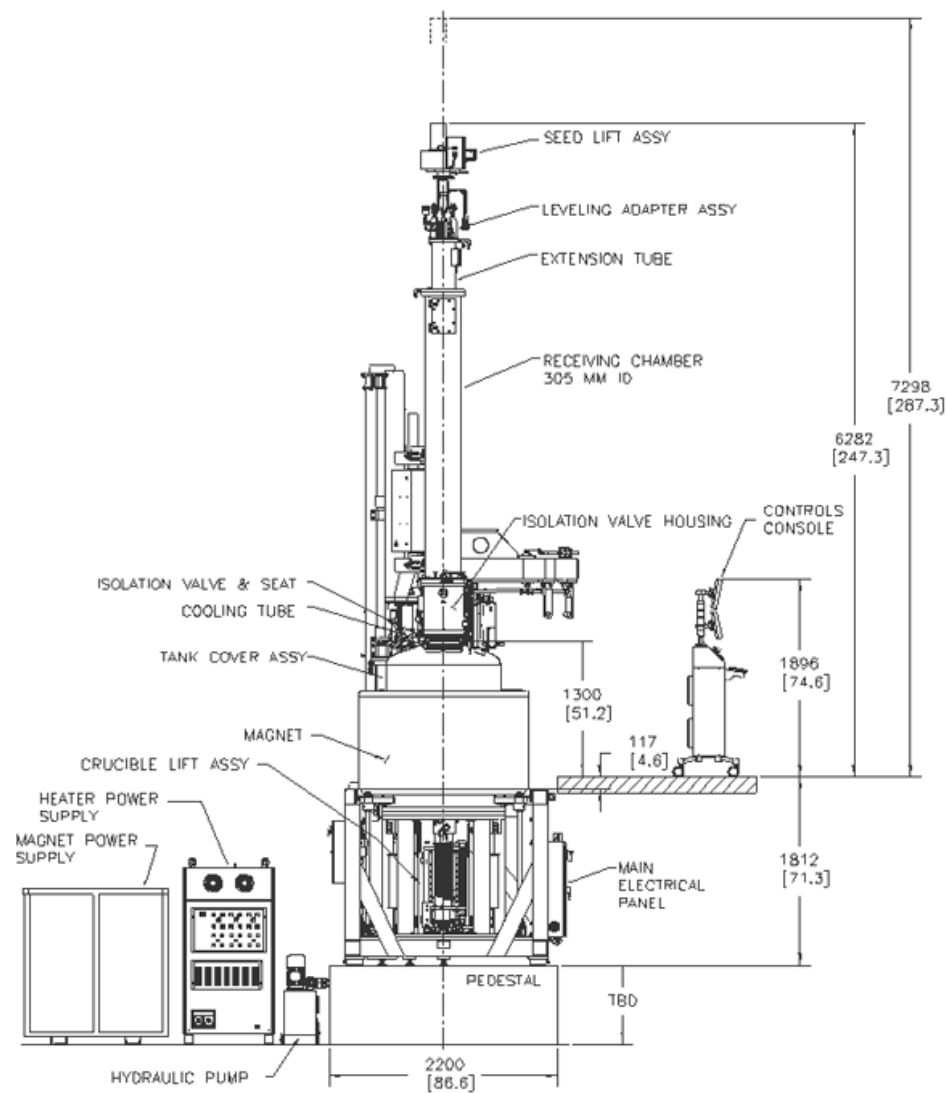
Typical dimensions of a commercial CZ puller from a technical data-sheet (source: Kayex)
